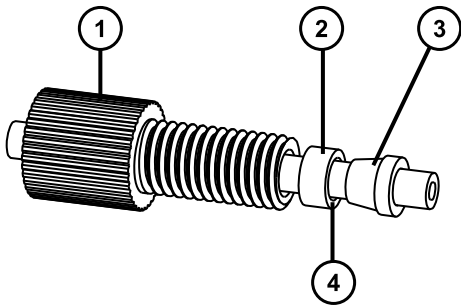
Short 1/4-28 fitting with flangeless ferrule and stainless steel lock ring, first-use or reinstall
